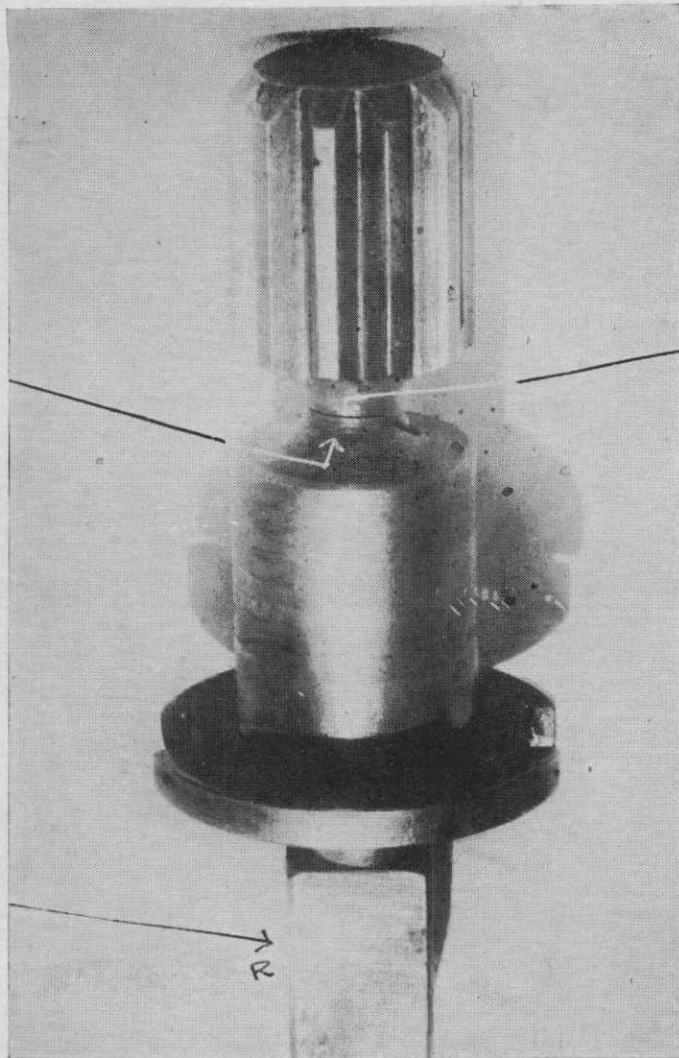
Photograph showing the line of fracture and deep tool mark at the waisted portion of the drive-shaft of the aero-engine fuel pump. X4
